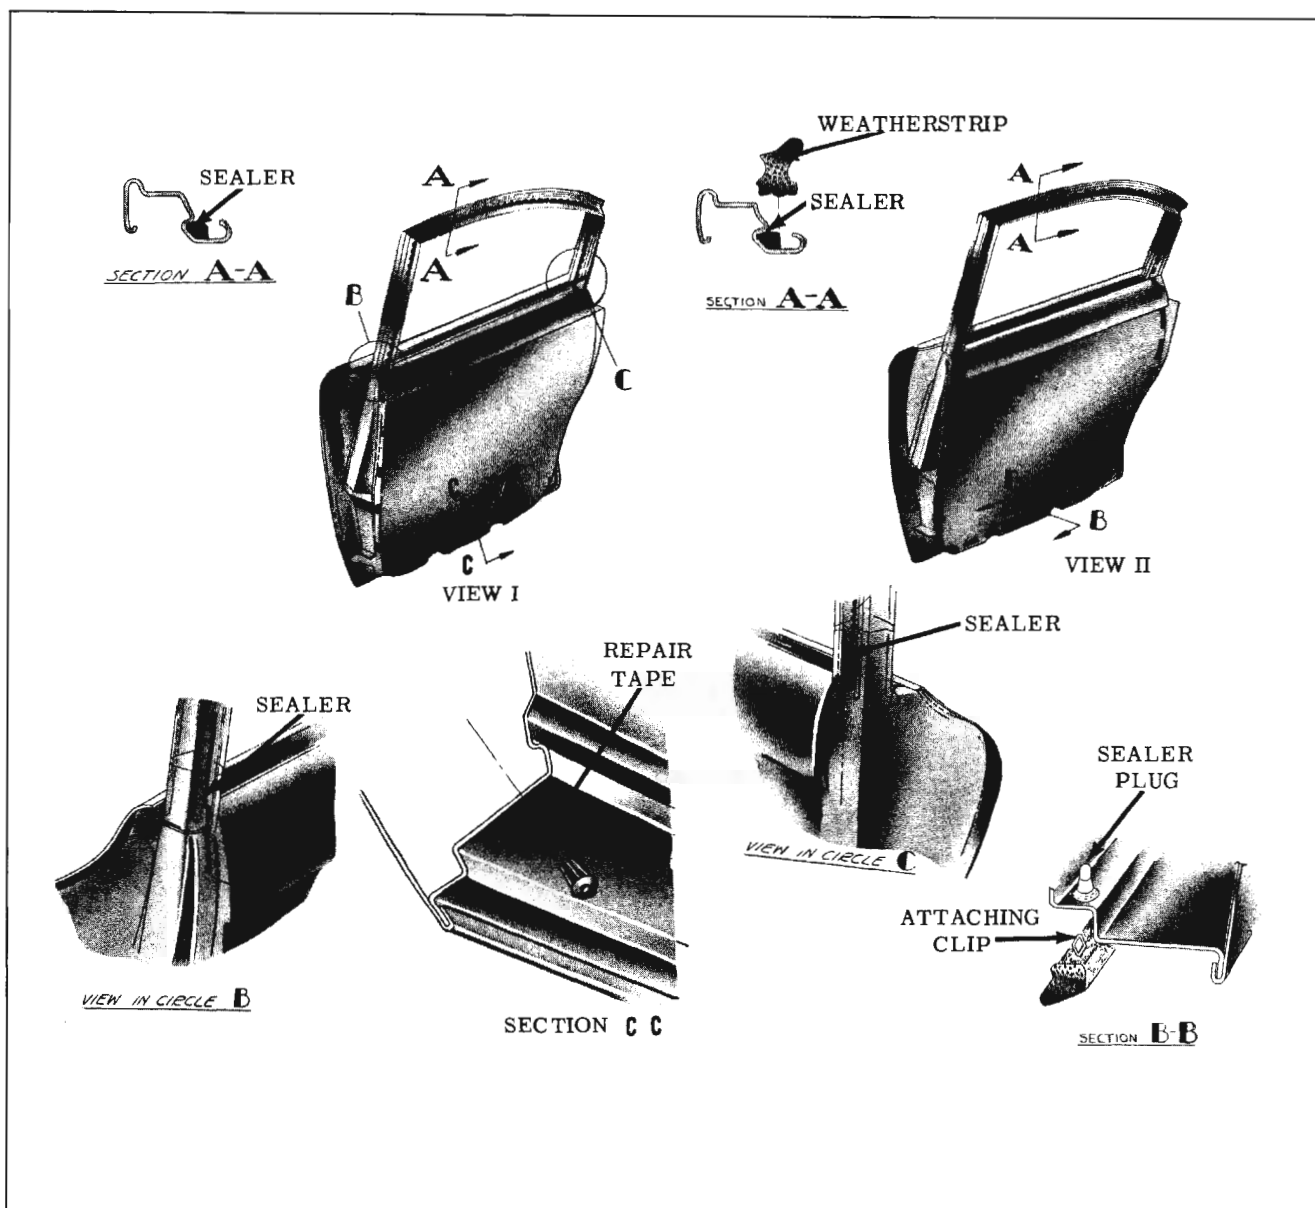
Repairing Weatherstrip Attaching Hole Sealing Plugs
